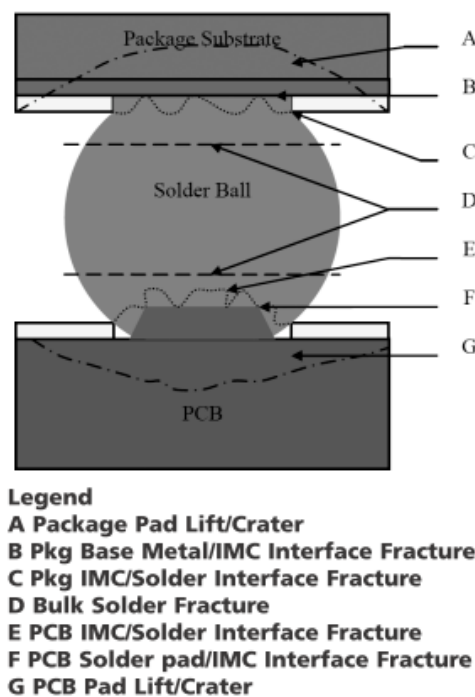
Different failure modes in PCB assembly [78]
